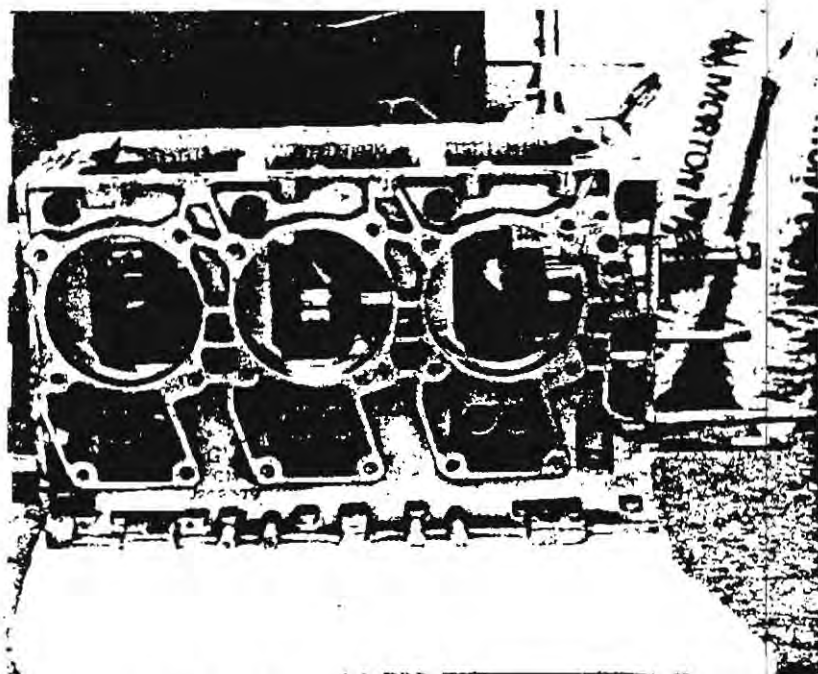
Assembled crankcase with crankshaft and cam installed, left side view.
